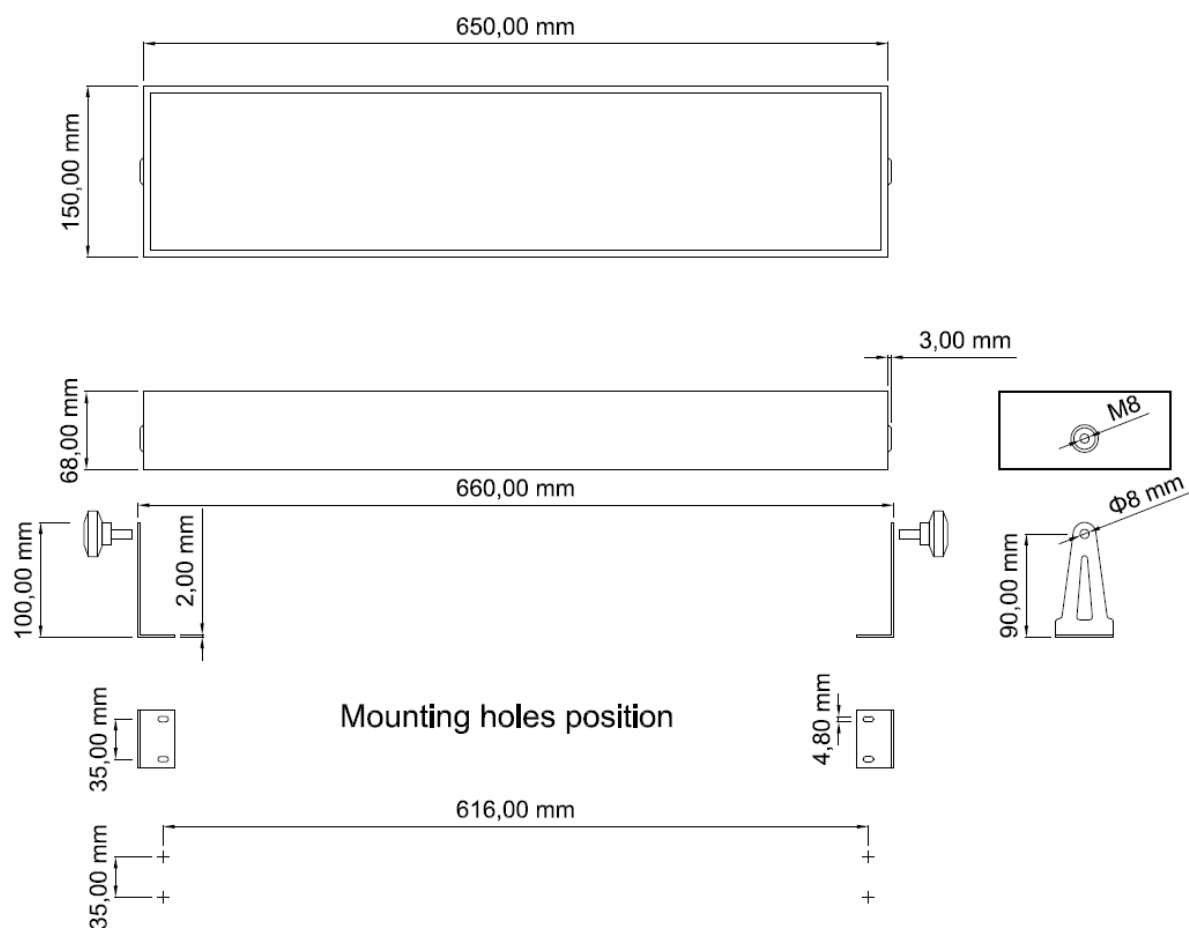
DU65/ND dimensions and positions of mounting holes.
